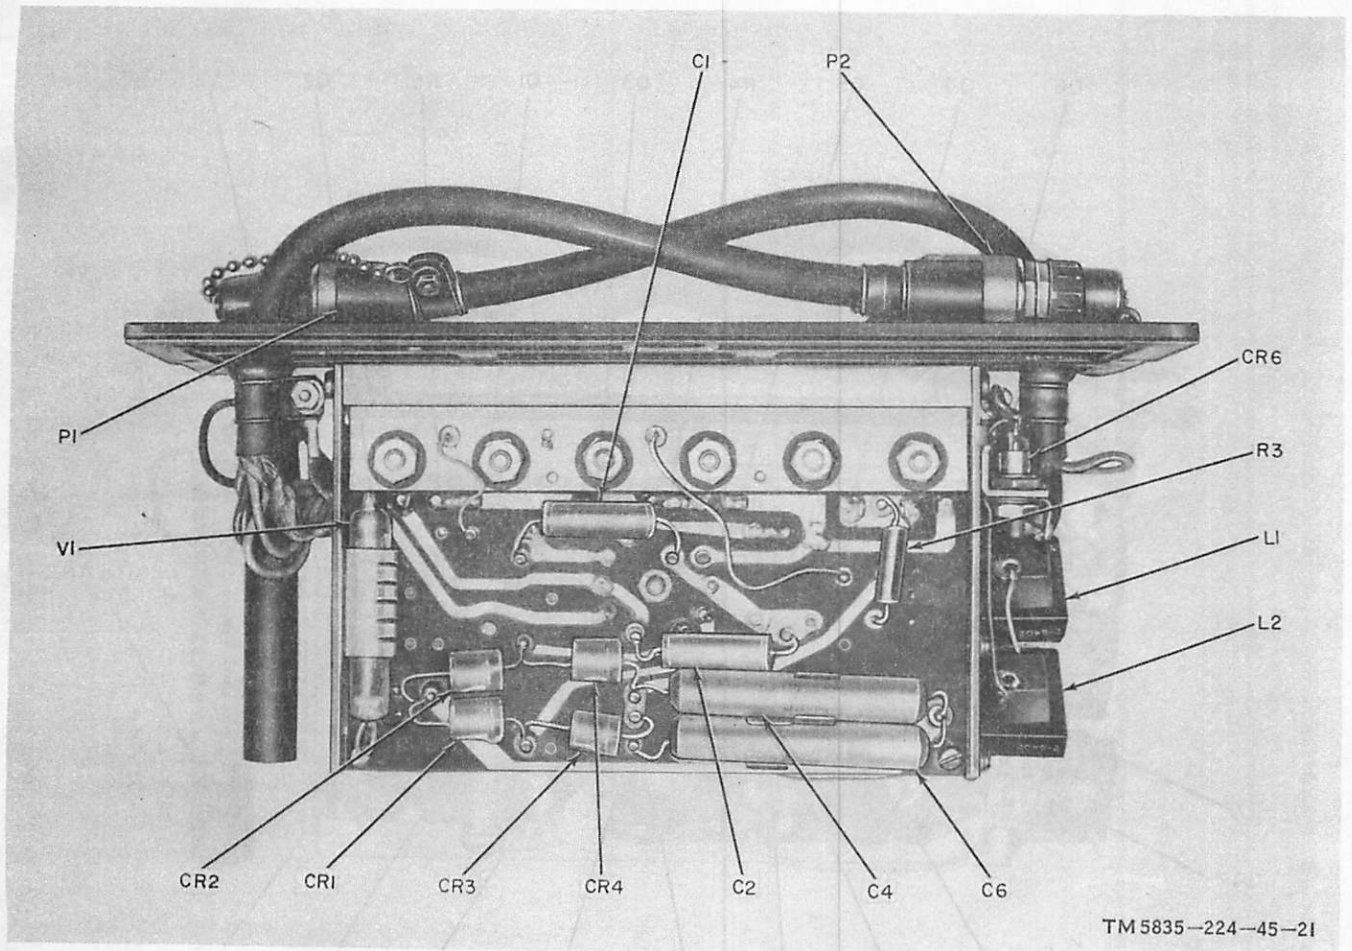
KA-3 keyer adapter with cover removed (storage components removed).
